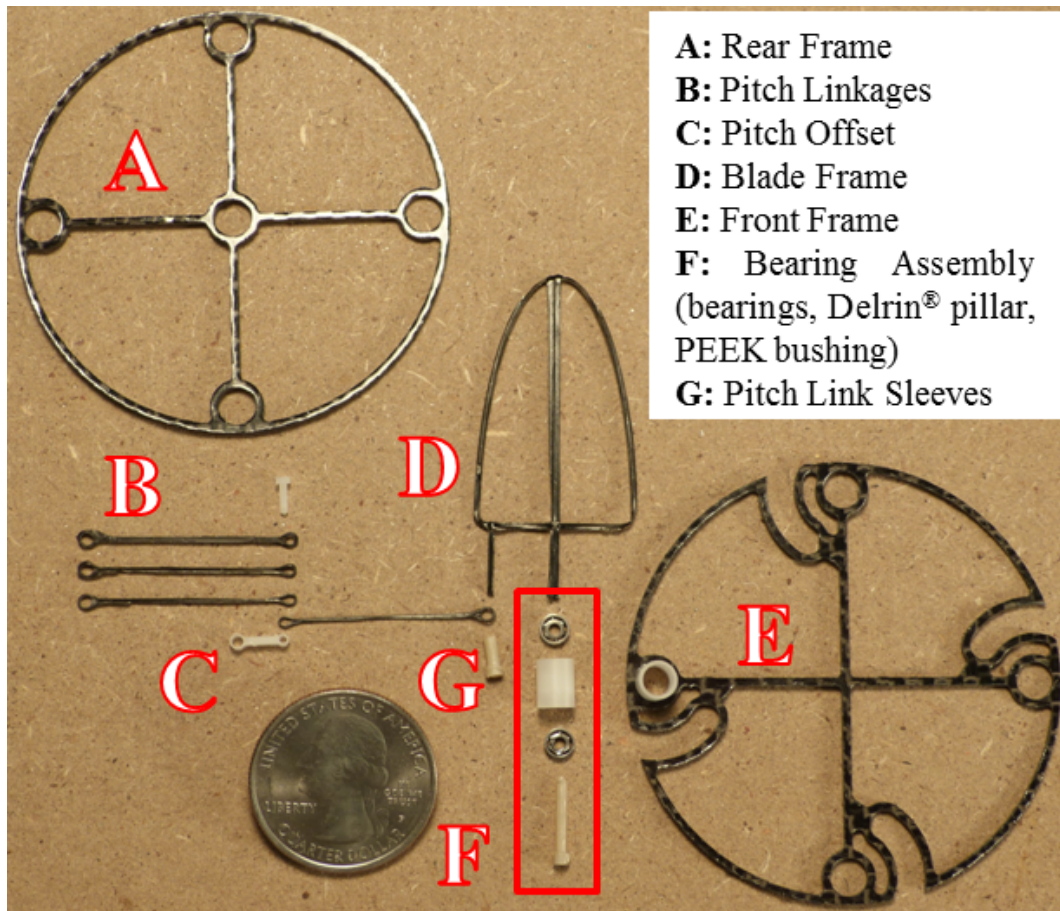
Exploded view of the rotor, pitching mechanism, and blades with parts labeled accordingly.
